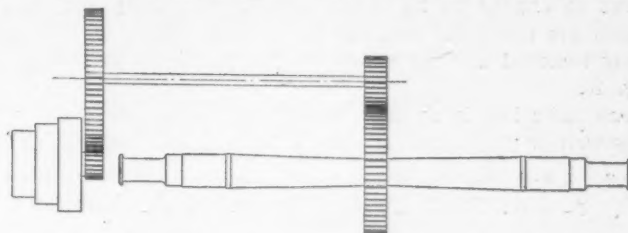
ORIGINAL ARRANGEMENT OF GEARING IN THE DRIVE OF A CAR-AXLE LATHE.
